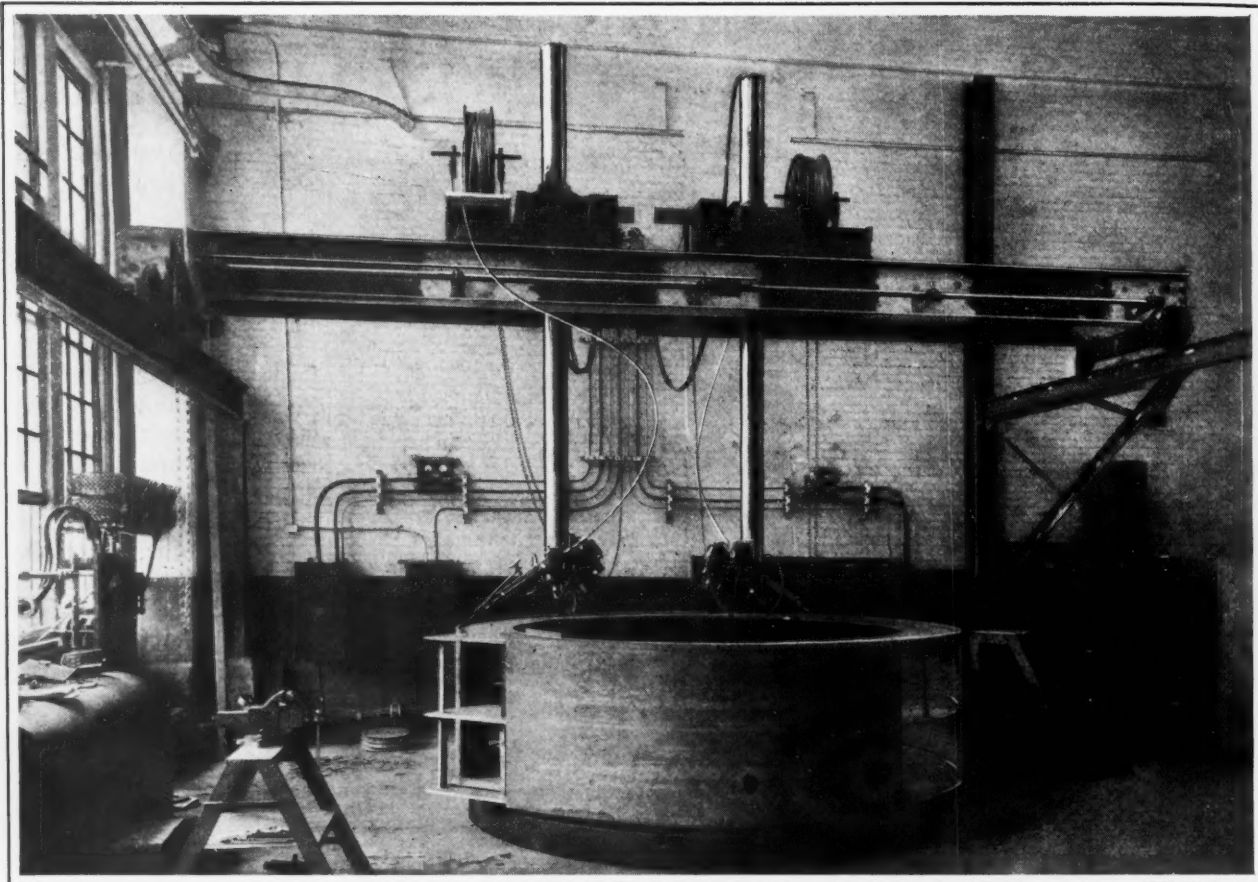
Welding Machine Provided with a Table which Revolves the Work Past Two Automatic Heads for Welding Along Circular Seams
